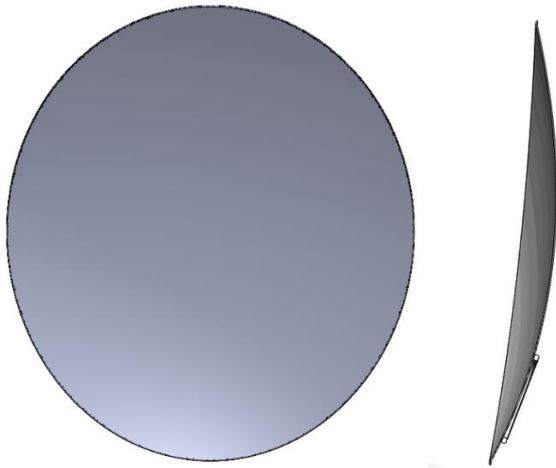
Offset aluminum antenna with a thickness of 2 mm (front view and side view in section)
